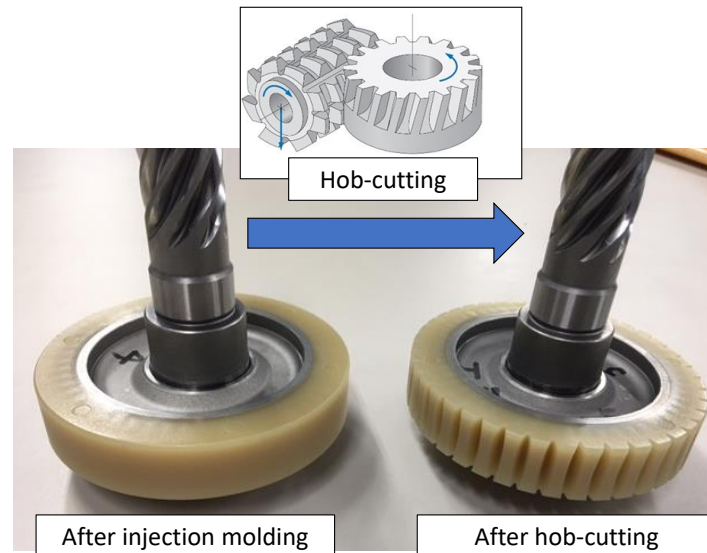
Hob-cutting process of worm wheel after injection molding.
